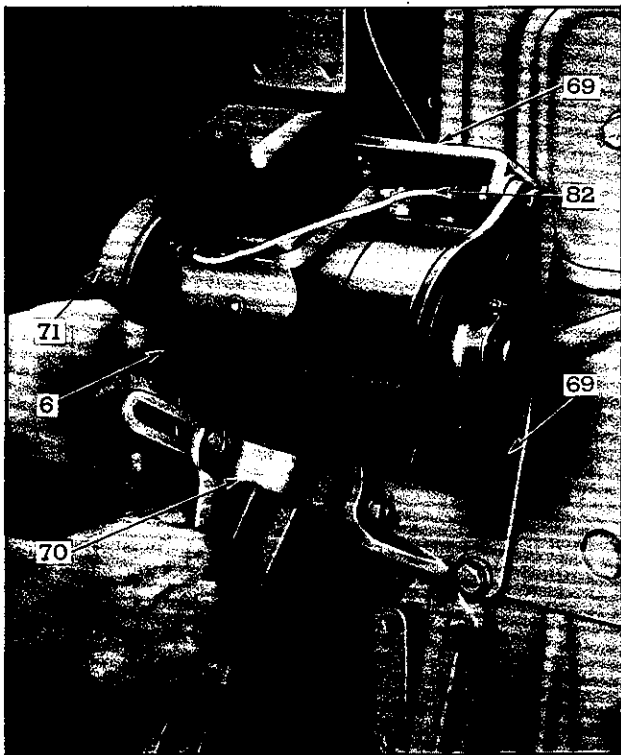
Battery Charging Generator Mounting and Belt Tension Adjustment.
